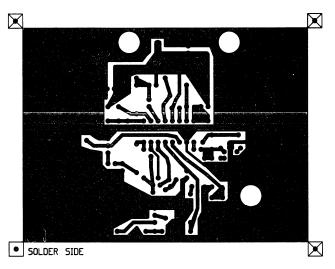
MC3372P PC BOARD CIRCUIT OR SOLDER SIDE AS VIEWED THRU COMPONENT SIDE
